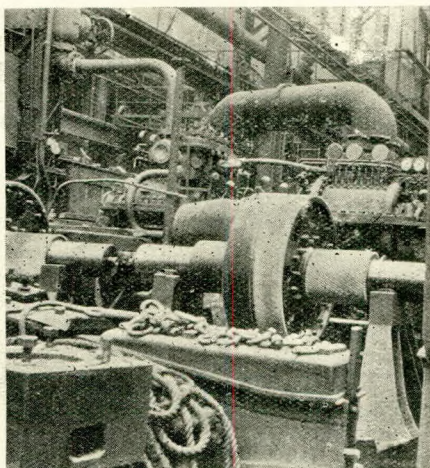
Intermediate wheel and pinions of the "interleaved" type of double reduction gearing.
